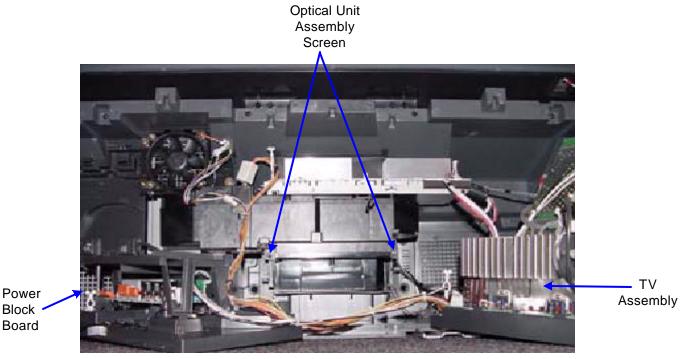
OPTICAL UNIT SCREWS EXPOSED
